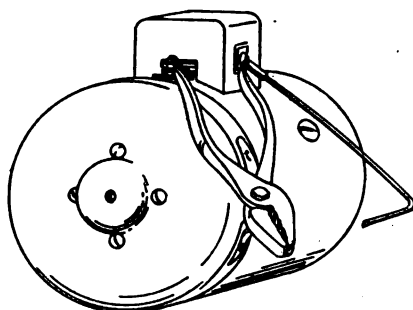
SHOWING HOW TO TEST THE CUT OUT OR REMAGNETIZING FIELDS OF GENERATOR WHILE IN POSITION WITH ENGINE RUNNING
